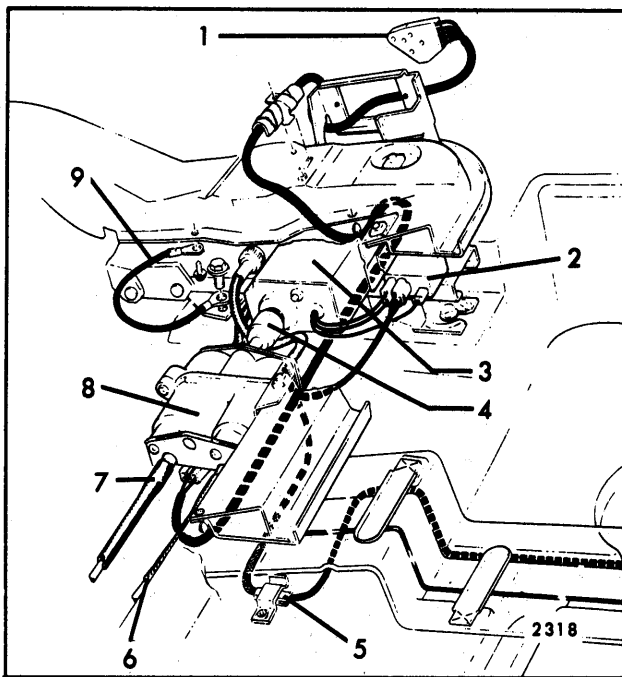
Four-Way Bench Seat Wiring - "A" Body Styles
